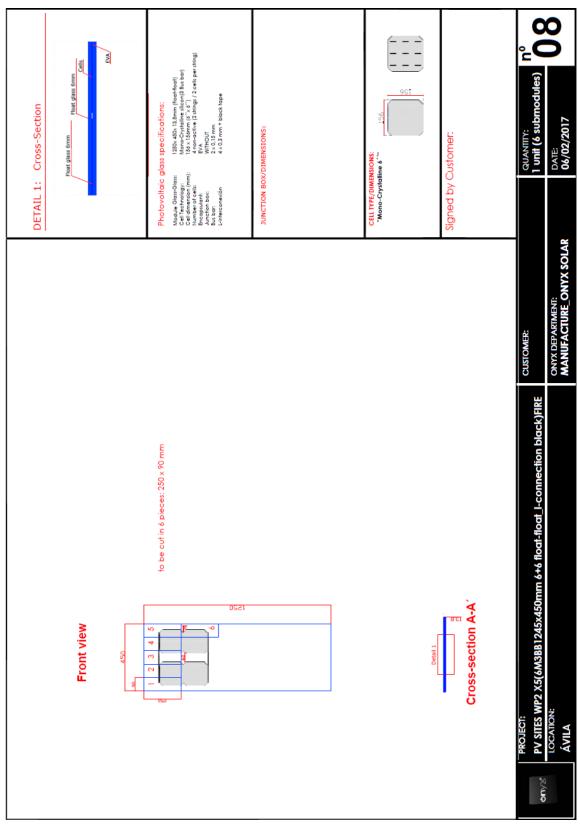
Manufacturing drawing of samples X5-8 and X5-9 (to be cut in 6 pieces)
